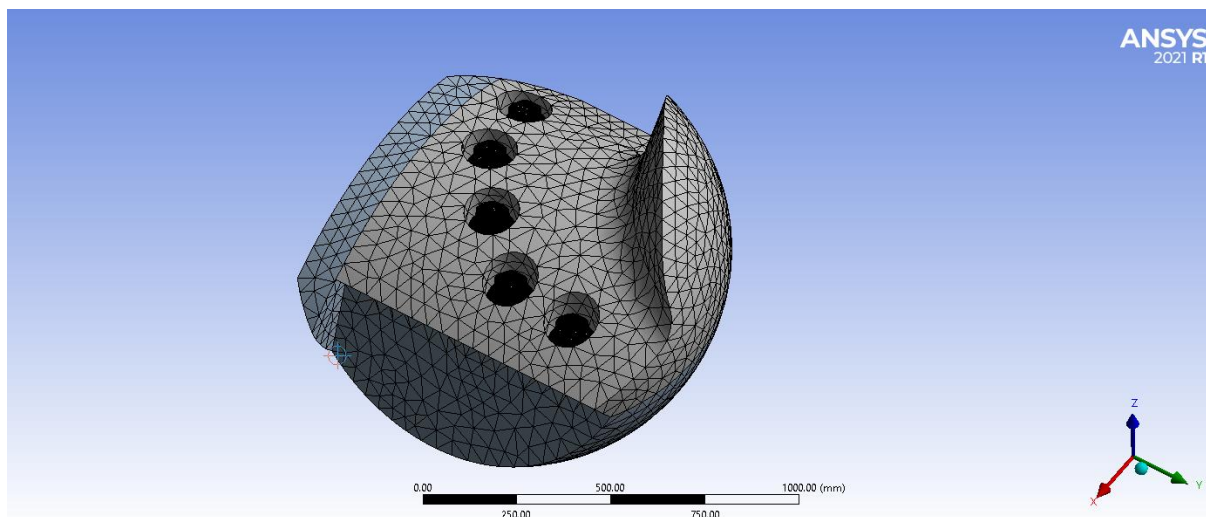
Sub-modelling geometry for critical bolted joint part from blade failure load
